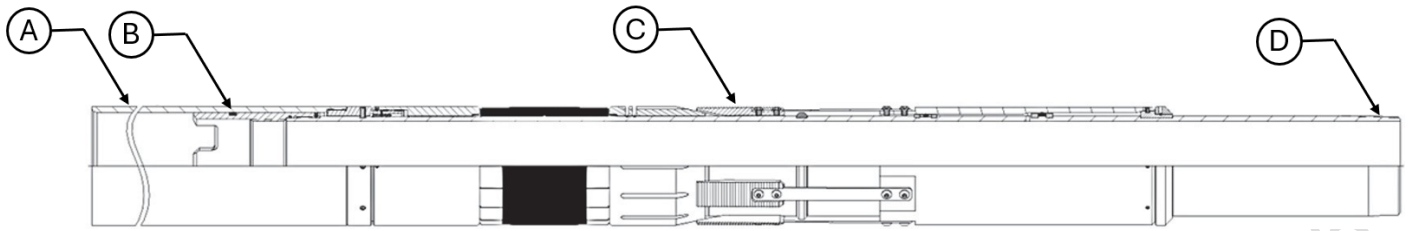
Mechanical Set Liner Hanger System, Activated by Pipe Manipulation
